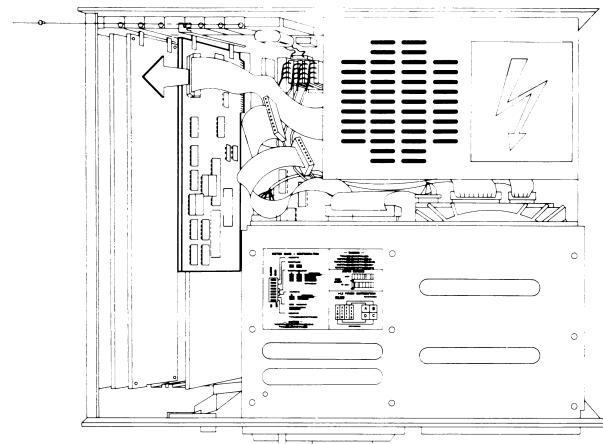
Removing the Multipurpose Controller Board Signal Cable.
